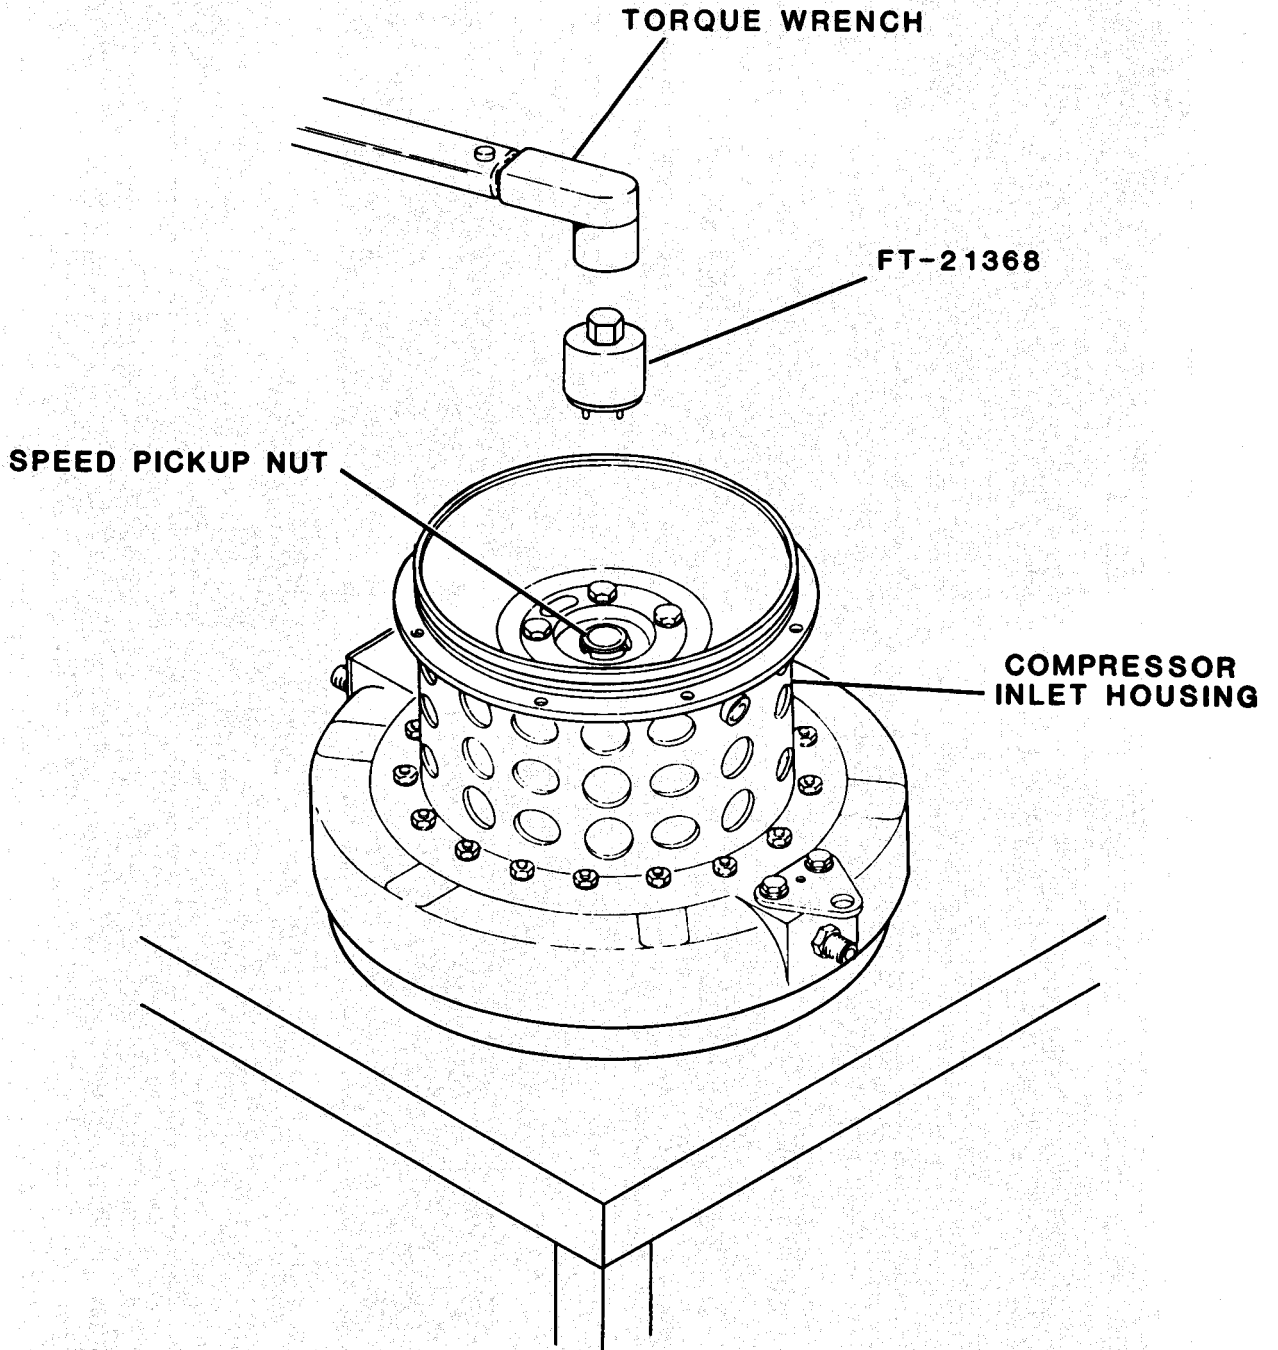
Removing/Installing Speed Pickup Nut Using Fabricated Tool FT-21368
